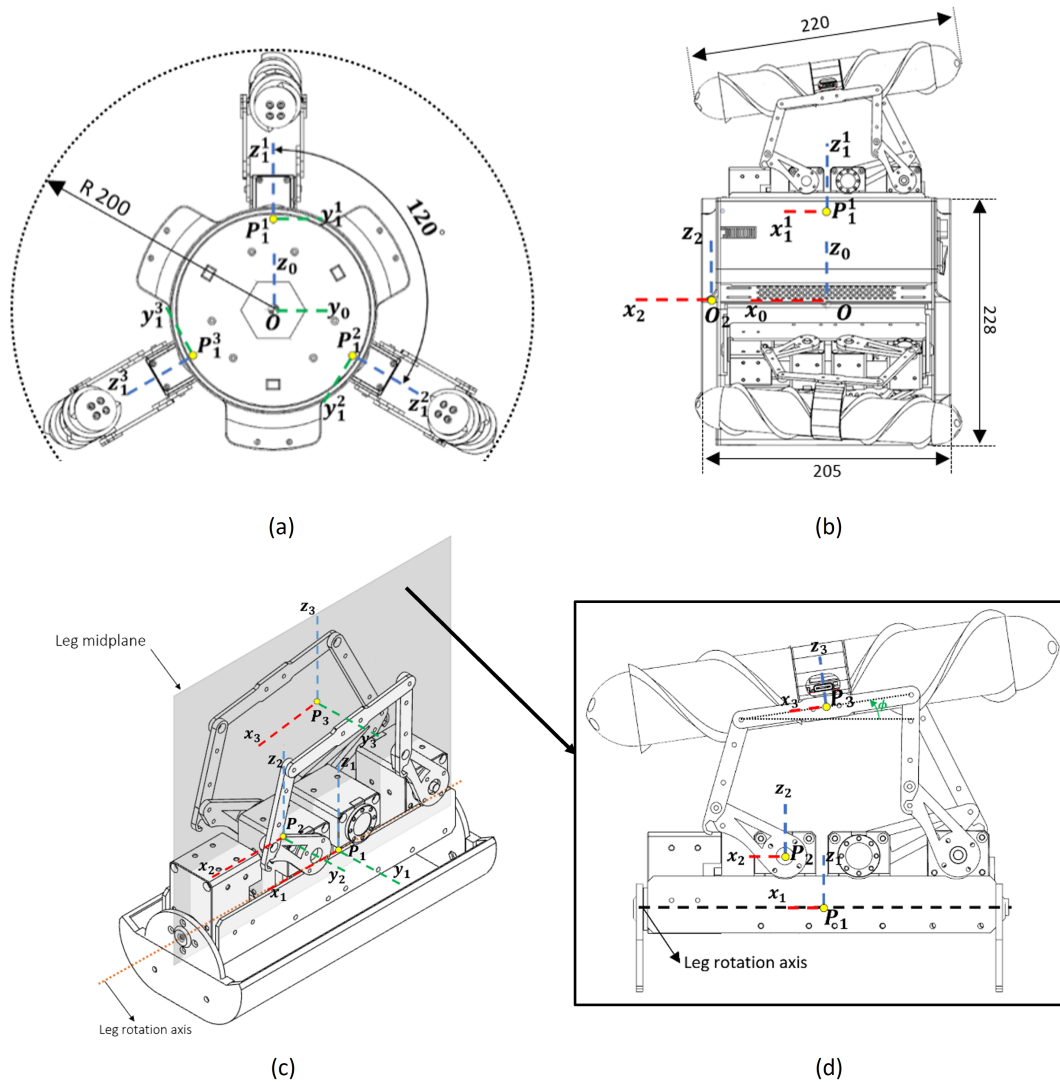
Robotic module reference frames and transformations to solve the kinematic problem. (a) Robot module front view. (b) Robot module lateral view. (c) Leg mechanism isometric view. (d) Midplane view of the leg mechanism equipped with a screw locomotion submodule as an end effector. All measurements are in millimeters.
